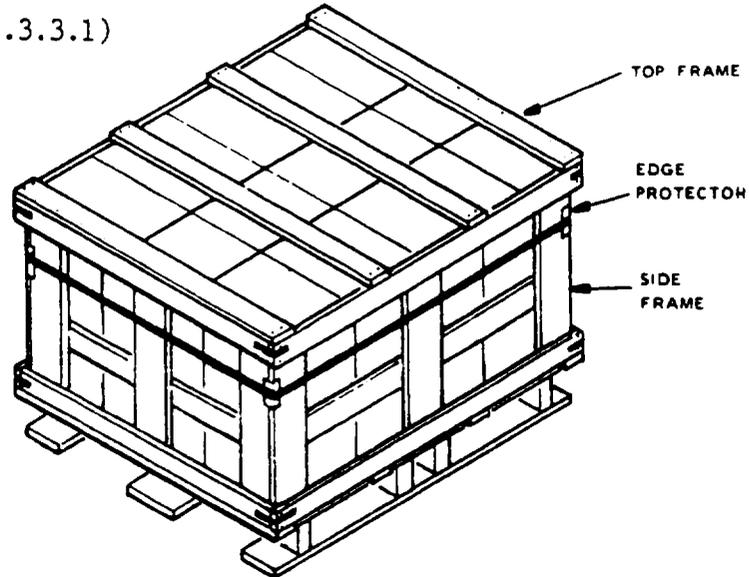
Bonding method C (top of a framed load outside the frame).
